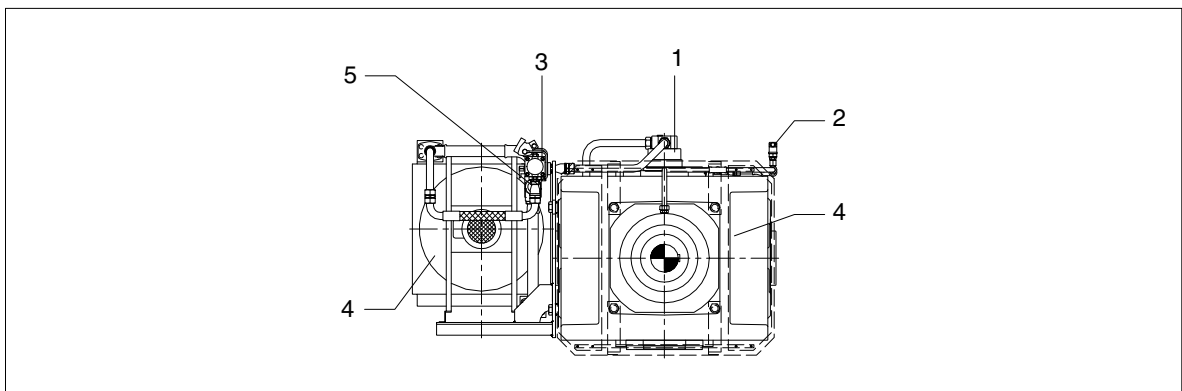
Air oil-cooling system on gear unit of type B3.V
